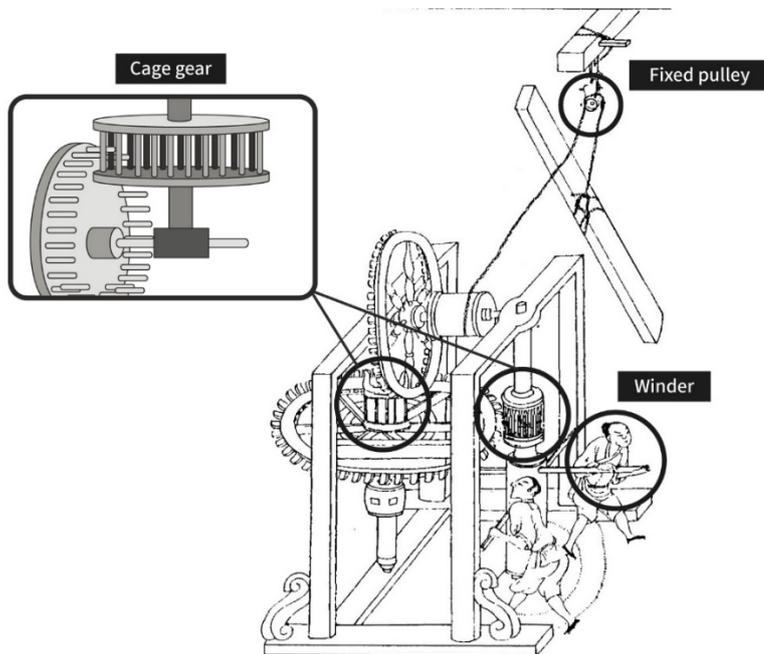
The 11th mechanical drawing of hoist. (起重第十一圖)
